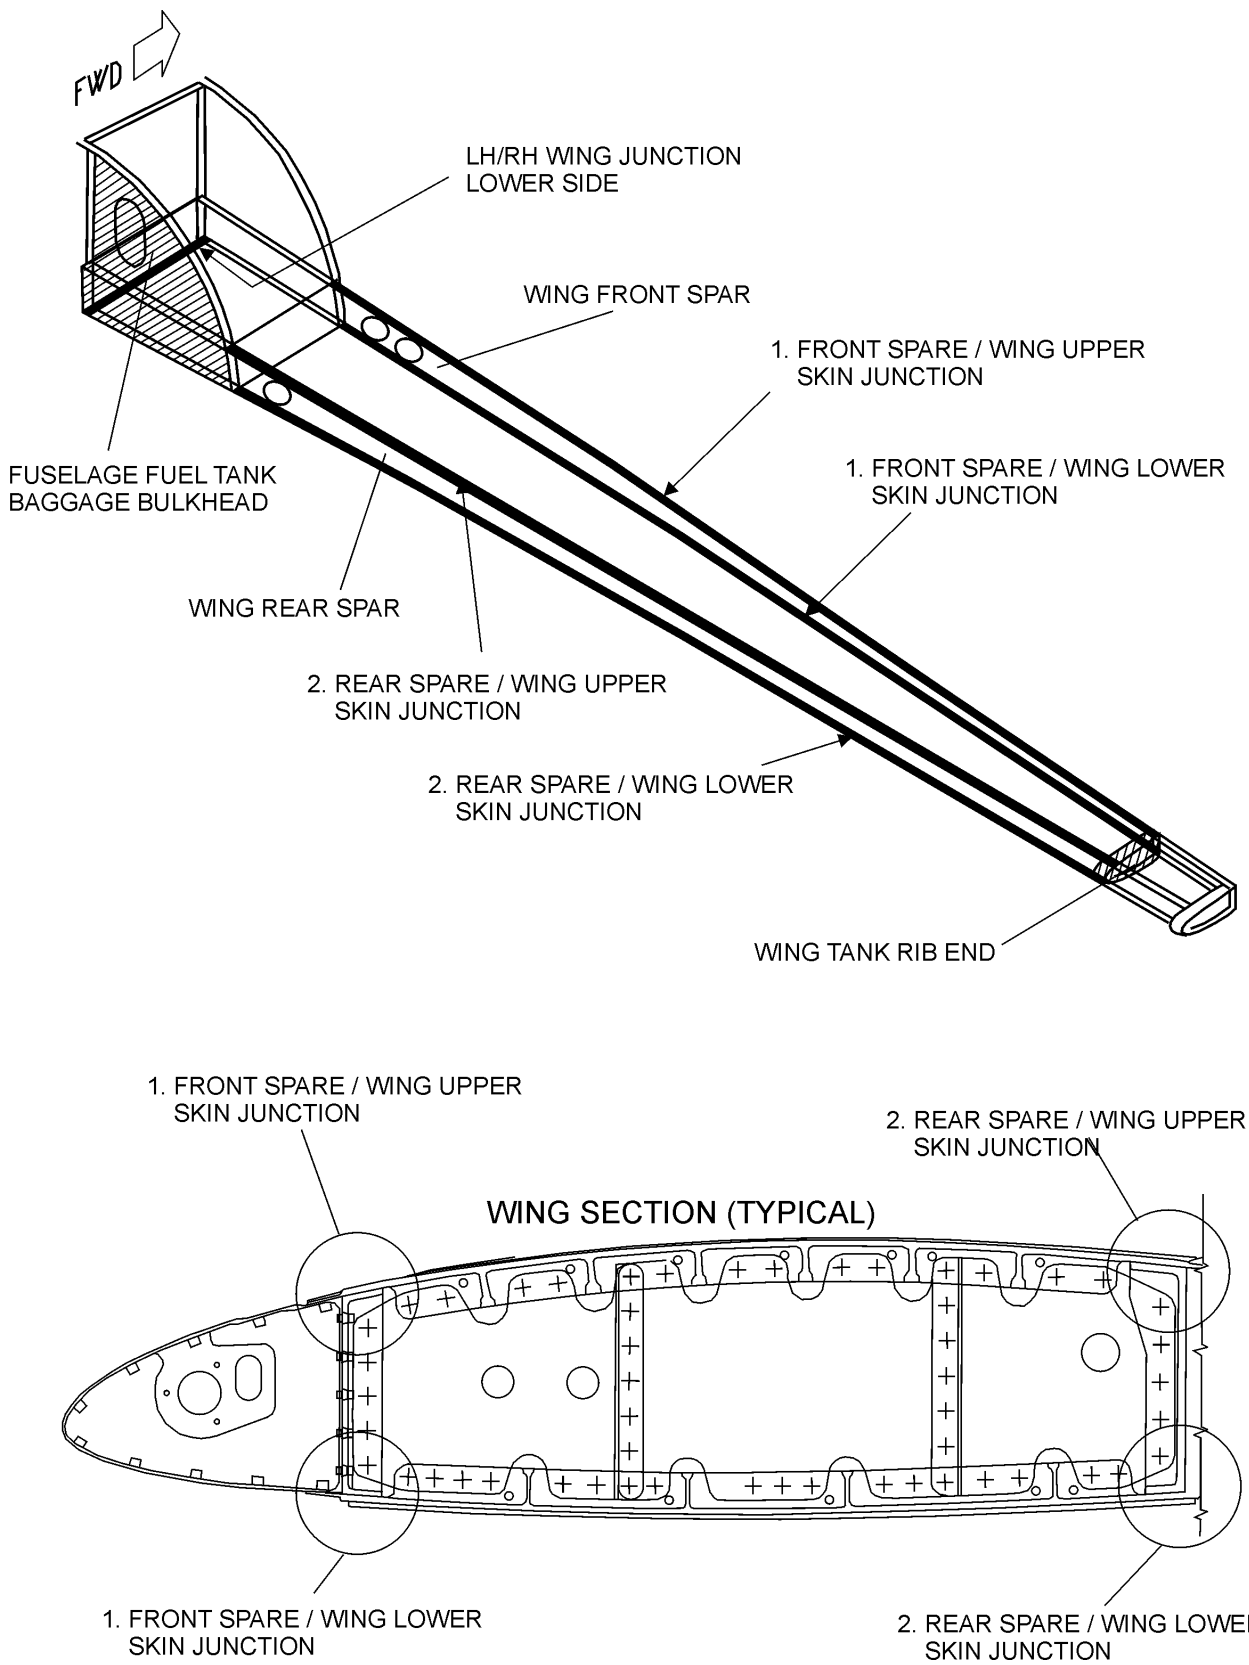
Fuel Tanks Acc. Pan, Components and Structure - Leakage Check (Sheet 1 of 3)
